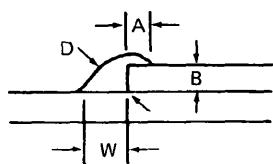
Typical Fillet Dimensions (Sheet 1 of 2)
